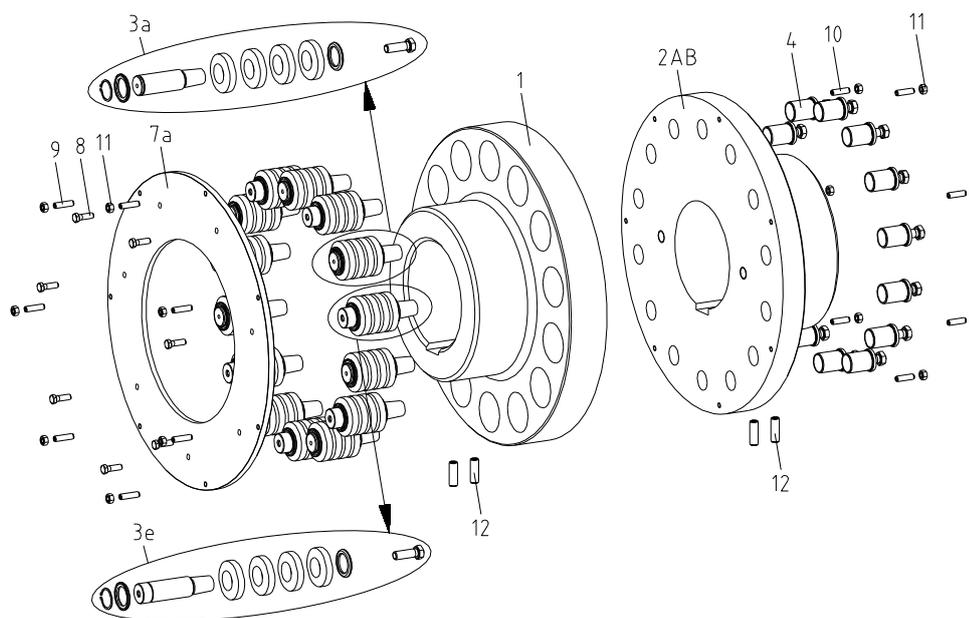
REVOLEX® type KX - AB (taper pin design B)
